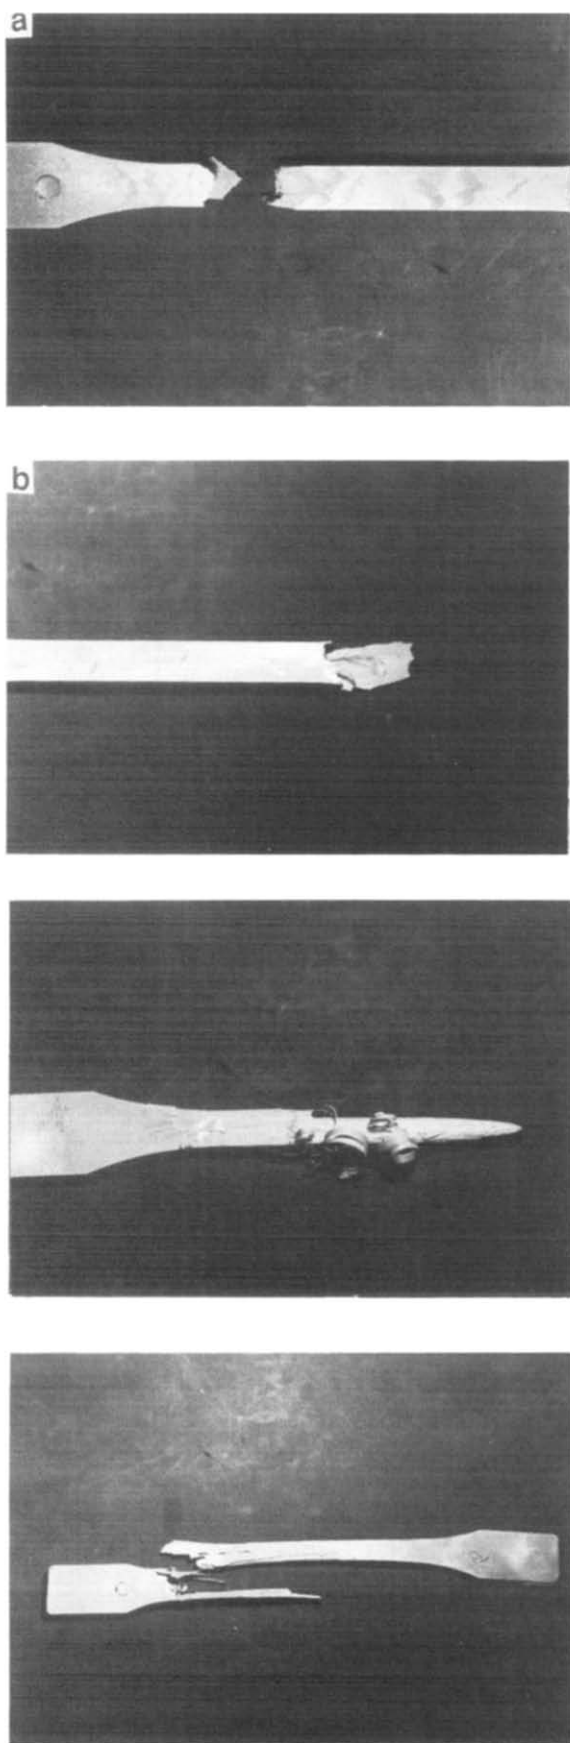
(a) Fracture surface of a 40 wt% mineral filled moulding (23°C, crosshead speed 2 mm min⁻¹). The flow direction during mould filling is from right to left. (b) Fracture surfaces of unfilled 4 mm × 10 mm mouldings. The upper two parts belong to the same specimen. From the lower specimen, a 0.5 mm layer had been machined from the surface prior to testing (23°C, crosshead speed 2 mm min⁻¹). The flow direction during mould filling is from right to left
